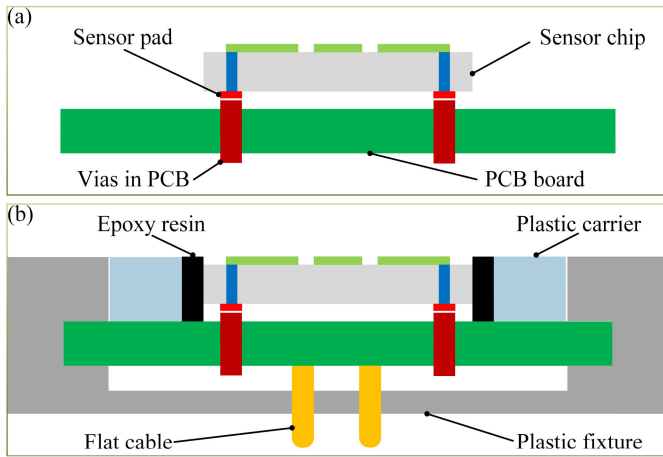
Schematic cross-sectional view of the packaged thermal convective accelerometer. (a) Sensor chip bonded to the PCB. (b) Sensor chip with protection and lead wire.
